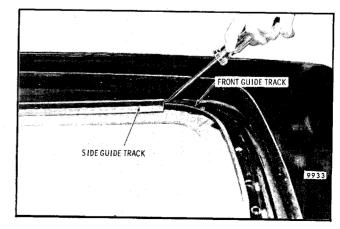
Checking Front to Side Guide Track Alignment - C Styles
